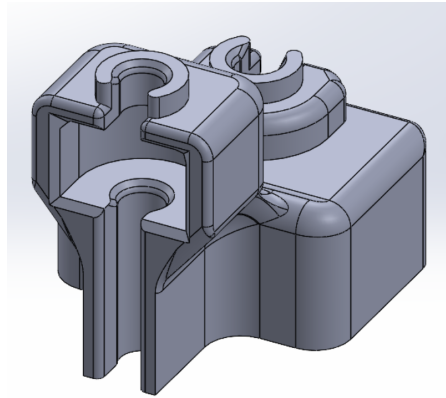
Fiber collection hammering fixture for press fit of gears on shaft
